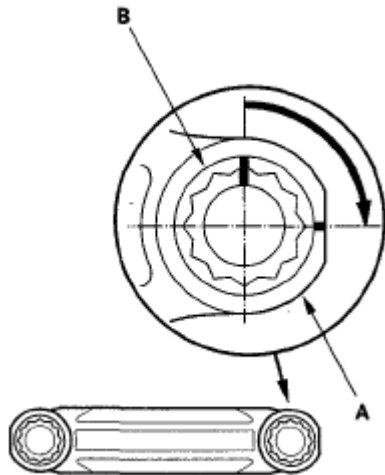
Identifying Marking Of Connecting Rod And Bolt Head
